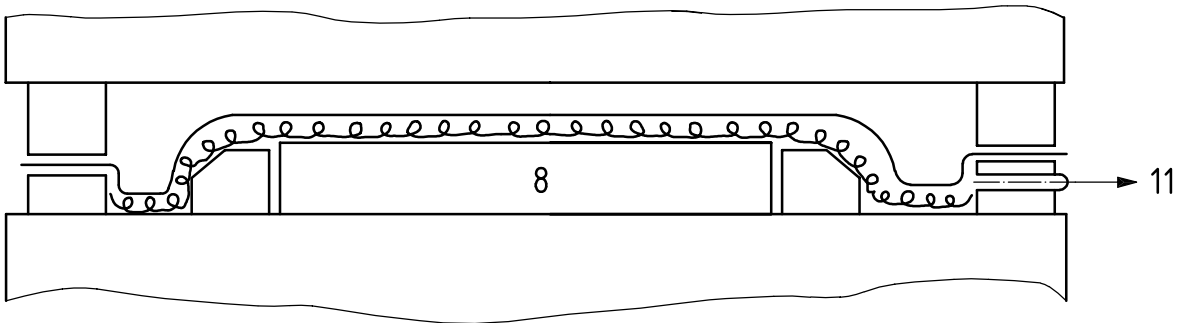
Typical test plate assembly for moulding in an autoclave
